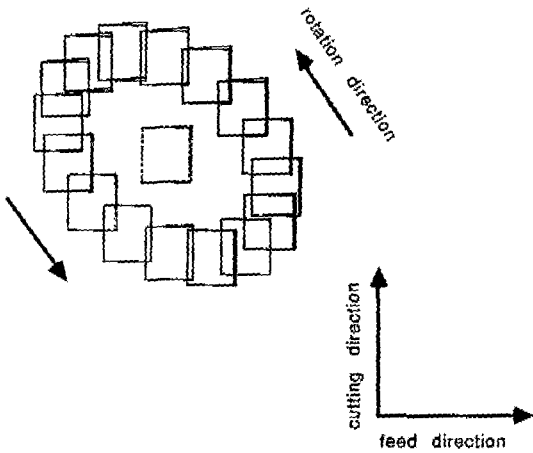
Y-view and trace of the tool edge at 4721 Hz
